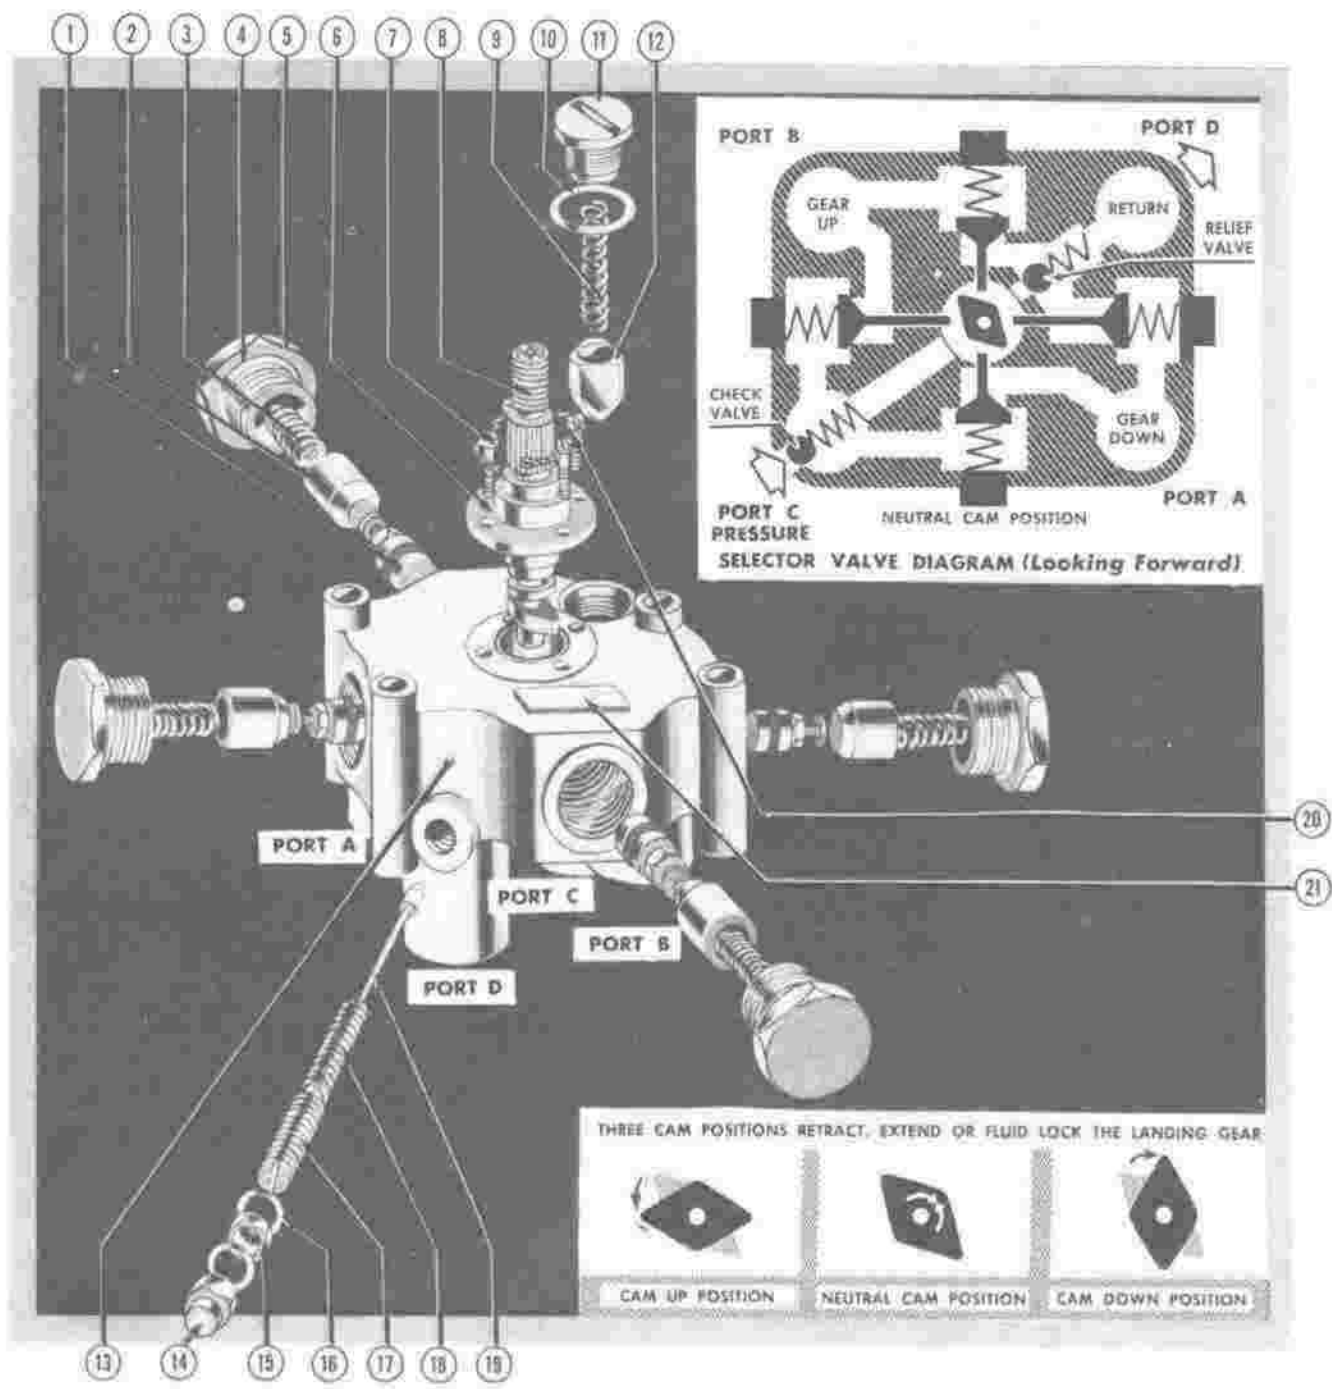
Landing Gear Position Selector Valve Cable Control System
